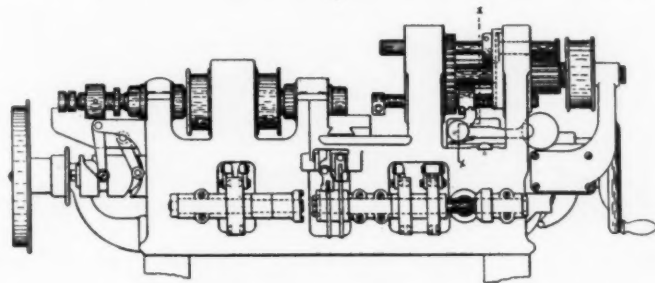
NO. 19 AUTOMATIC SCREW MACHINE
